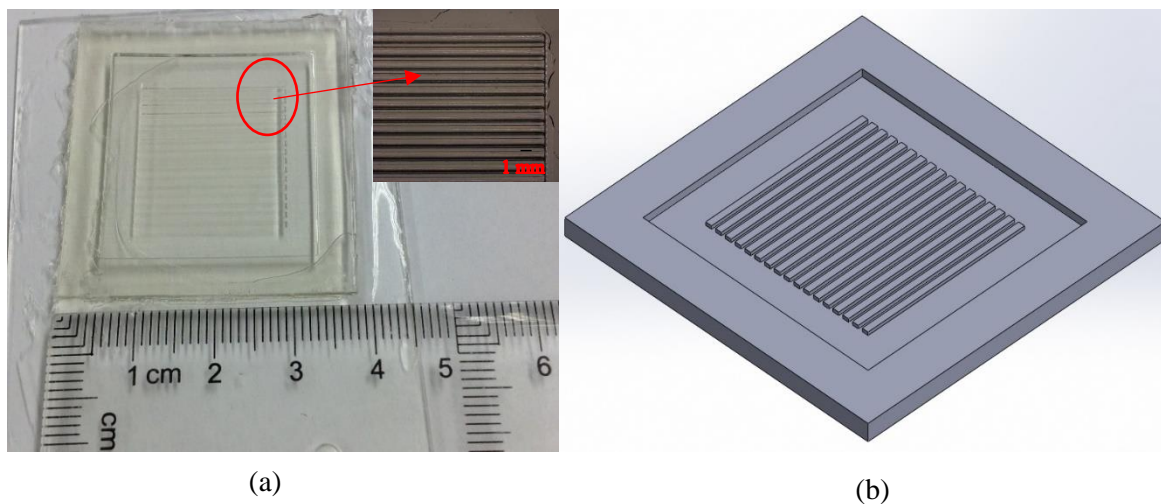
(a) The image of a prepared 3D-printed mould and (b) the schematic of the 3D printed mould
